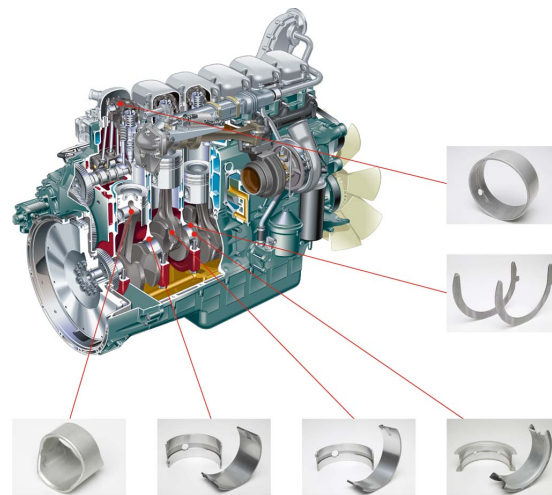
Application of bearings, bushings and thrust washers in the internal combustion engine
